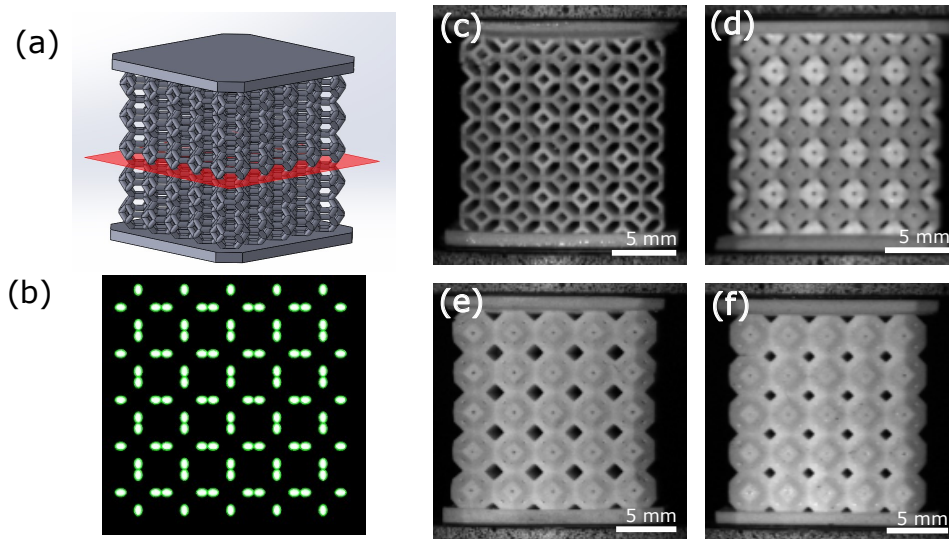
Design and manufacture of rod and plate lattice specimens: (a) CAD model of R15 specimen; (b) cross-sectional illumination of DLP manufacturing technique for layer highlighted in (a); manufactured photopolymer lattice specimen with (c) R15, (d) R30, (e) P15, and (f) P30 geometries.
